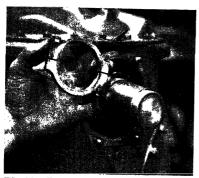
FITTING THE THRUST RACE CLAMP NUT IN POSITION (1) (SERIES I).
